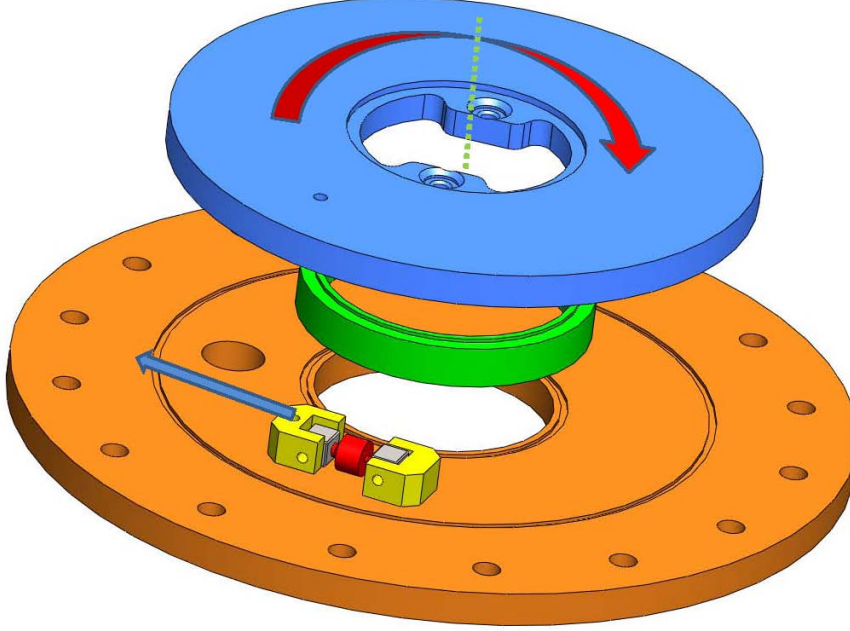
Superwind torque measurement assembly - The 3D CAD model of a torque measurement assembly consisting of two plates and a force transducer in between. The bottom plate (orange) is fixed to the frame while the top plate (blue) is fixed to the cryostat's TTE. The ring (green) has the purpose of simple bearing. It allows the rotation around the cryostat's axial axis. The force transducer element (red) is fixed to the bottom plate at one side and to the top plate on the other side (yellow). The torque (red arrow) experienced by the top plate is translated into an elongation force of a force transducer (blue arrow) and finally into a voltage signal from a strain gauge which is proportional to the torque.
